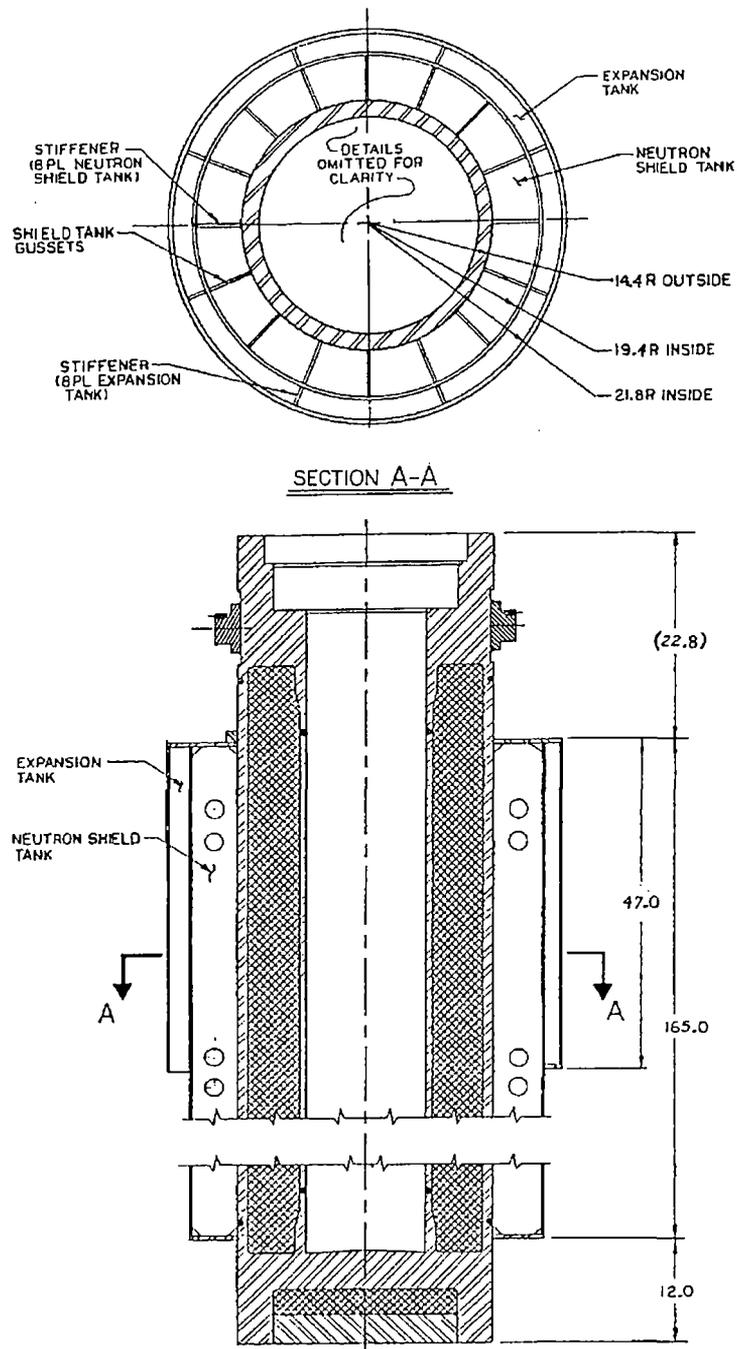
Component Parts of Shield Tank Structure
